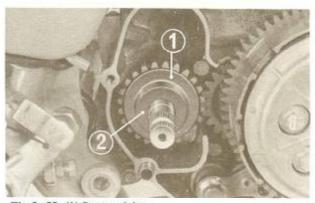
(1) Starter pinion (2) Thrust washer
